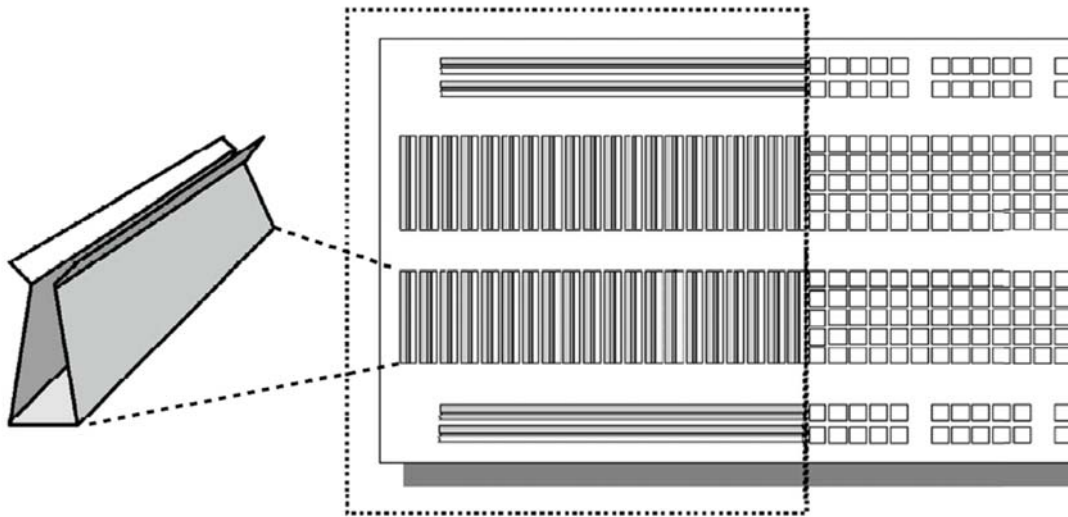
Breadboard cutaway drawing showing metal wire clip.
